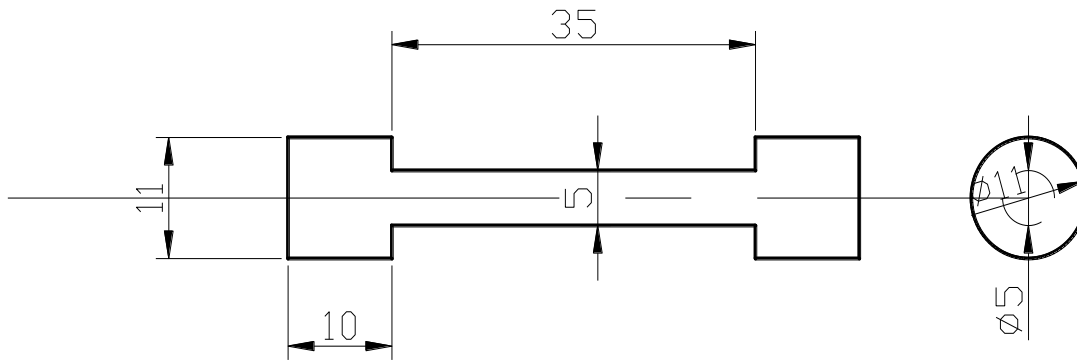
Standard(ASTM) Carbon Steel Specimen for Tensile Test(Dimensions in mm)
